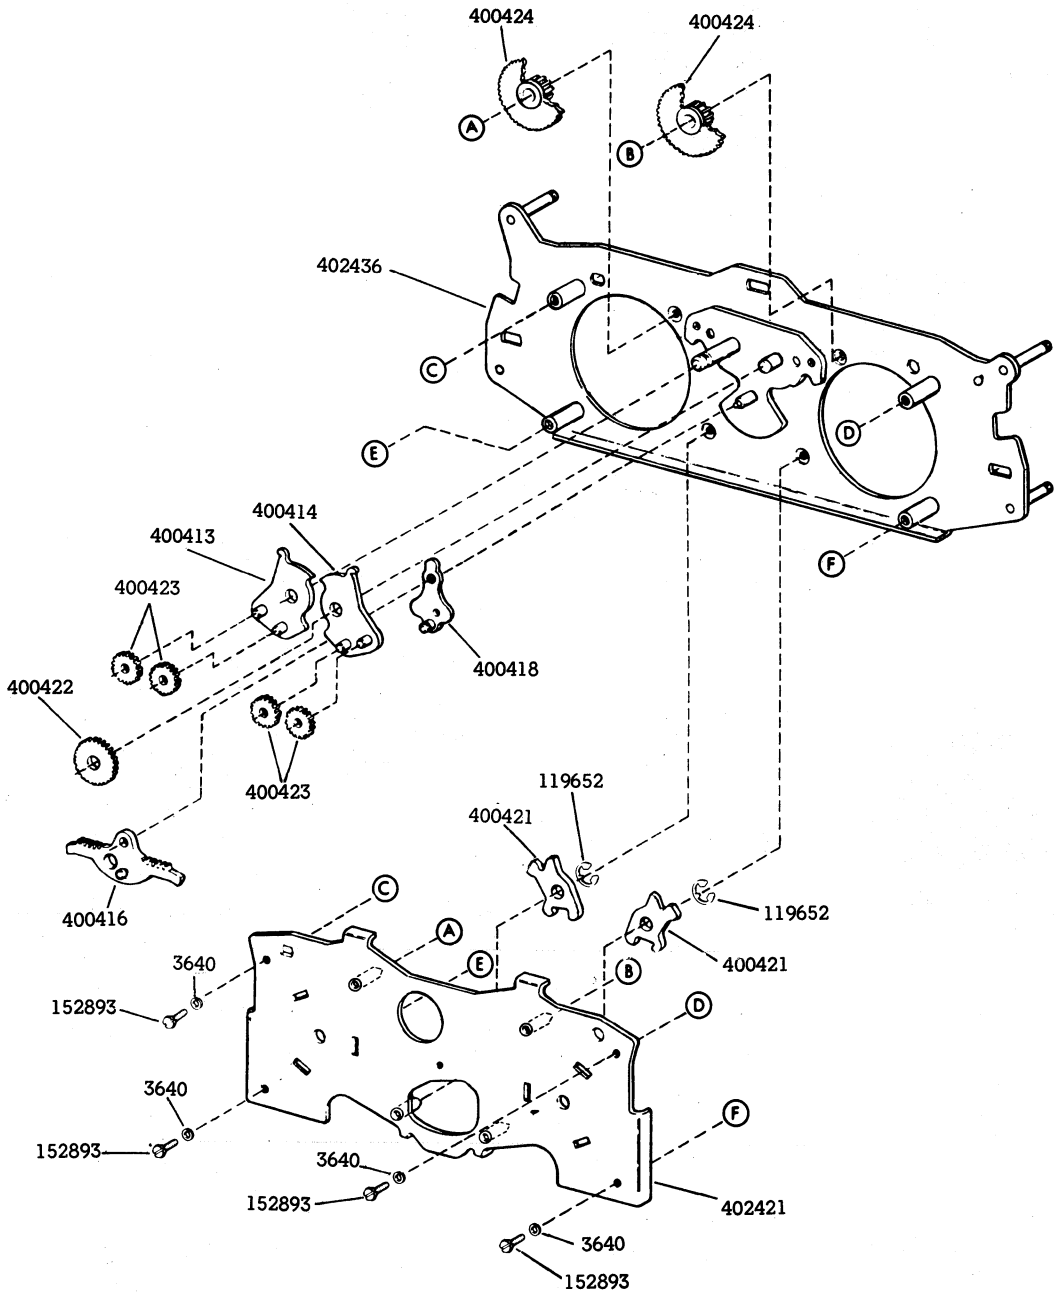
Ribbon Feed Frame Assembly (Late Design)
